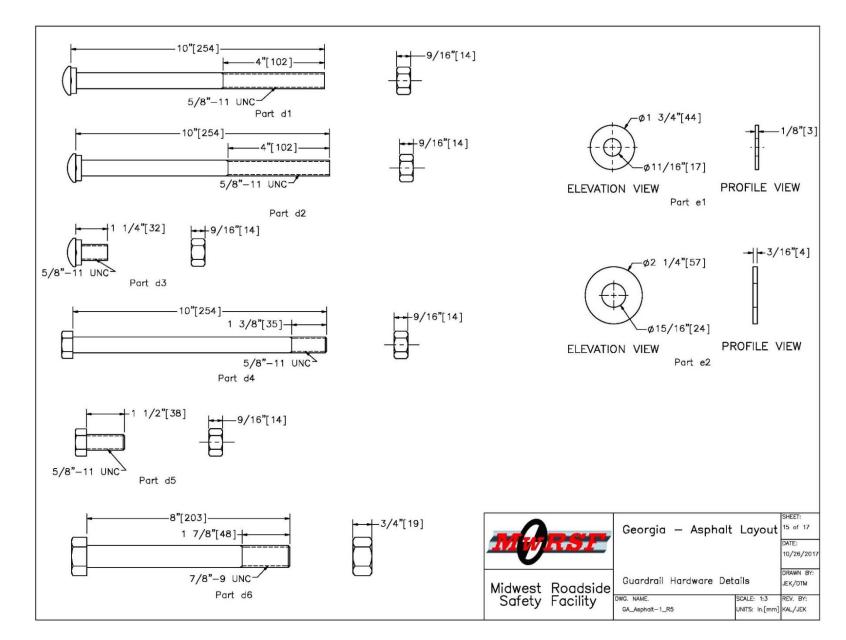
Guardrail Hardware Details, Test No. GAA-1
